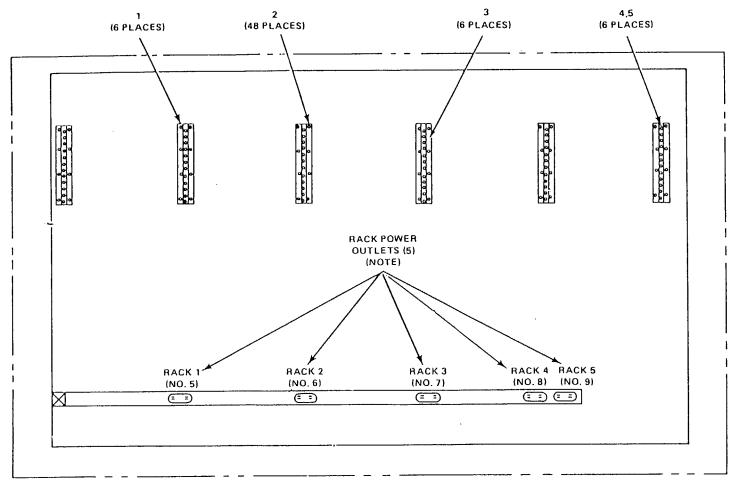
Electrical Equipment Shelter S-281/G Floor E-10
